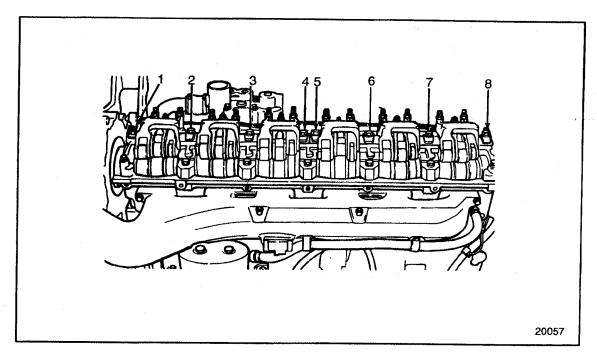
Rocker Arm Shaft Bolts and Nut Identification Numbers
